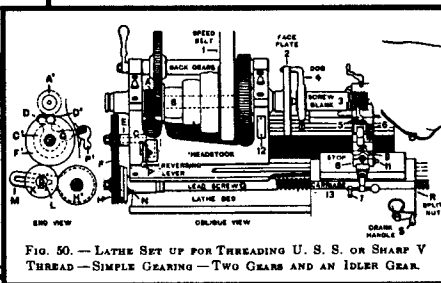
LATHE SET UP FOR THREADING U. S. S. OR SHARP V THREAD—SIMPLE GEARING—TWO GEARS AND AN IDLER GEAR.
